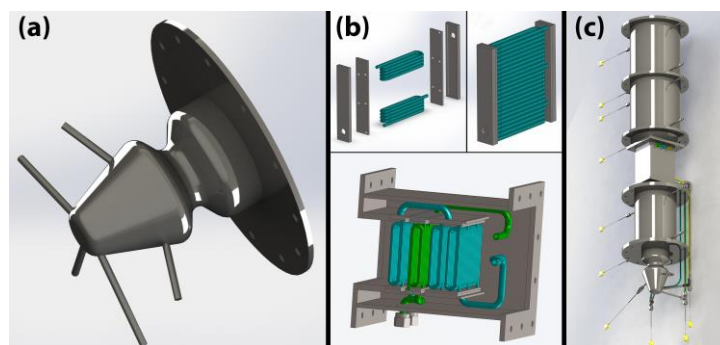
(a) Mixing Module; (b) Views of heat exchangers component; (c) Assembled Fuel Processor
